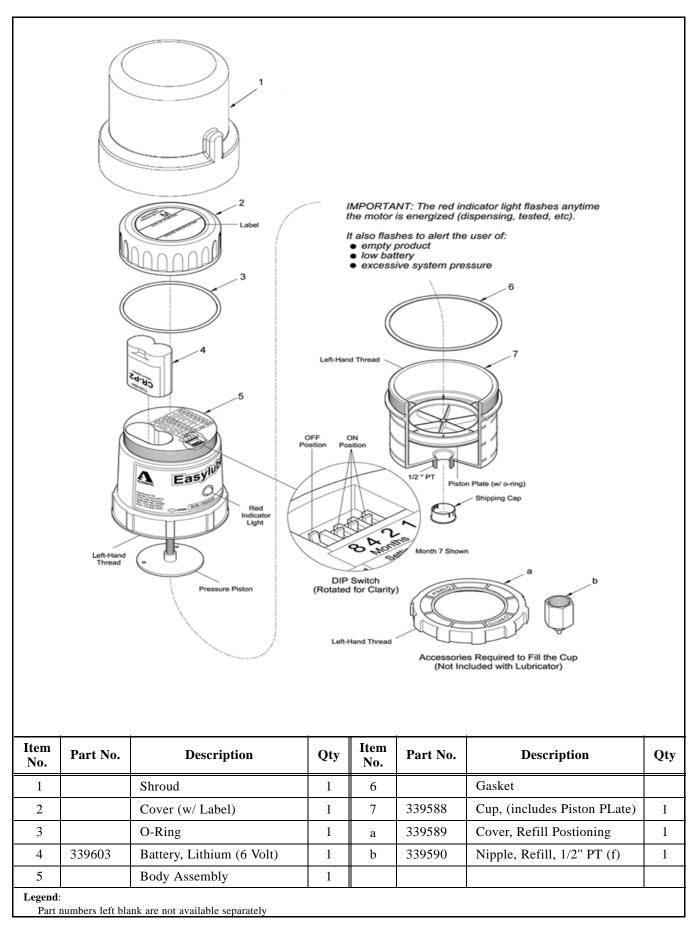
Easylube Lubricator Model 1746-151 - Exploded View
